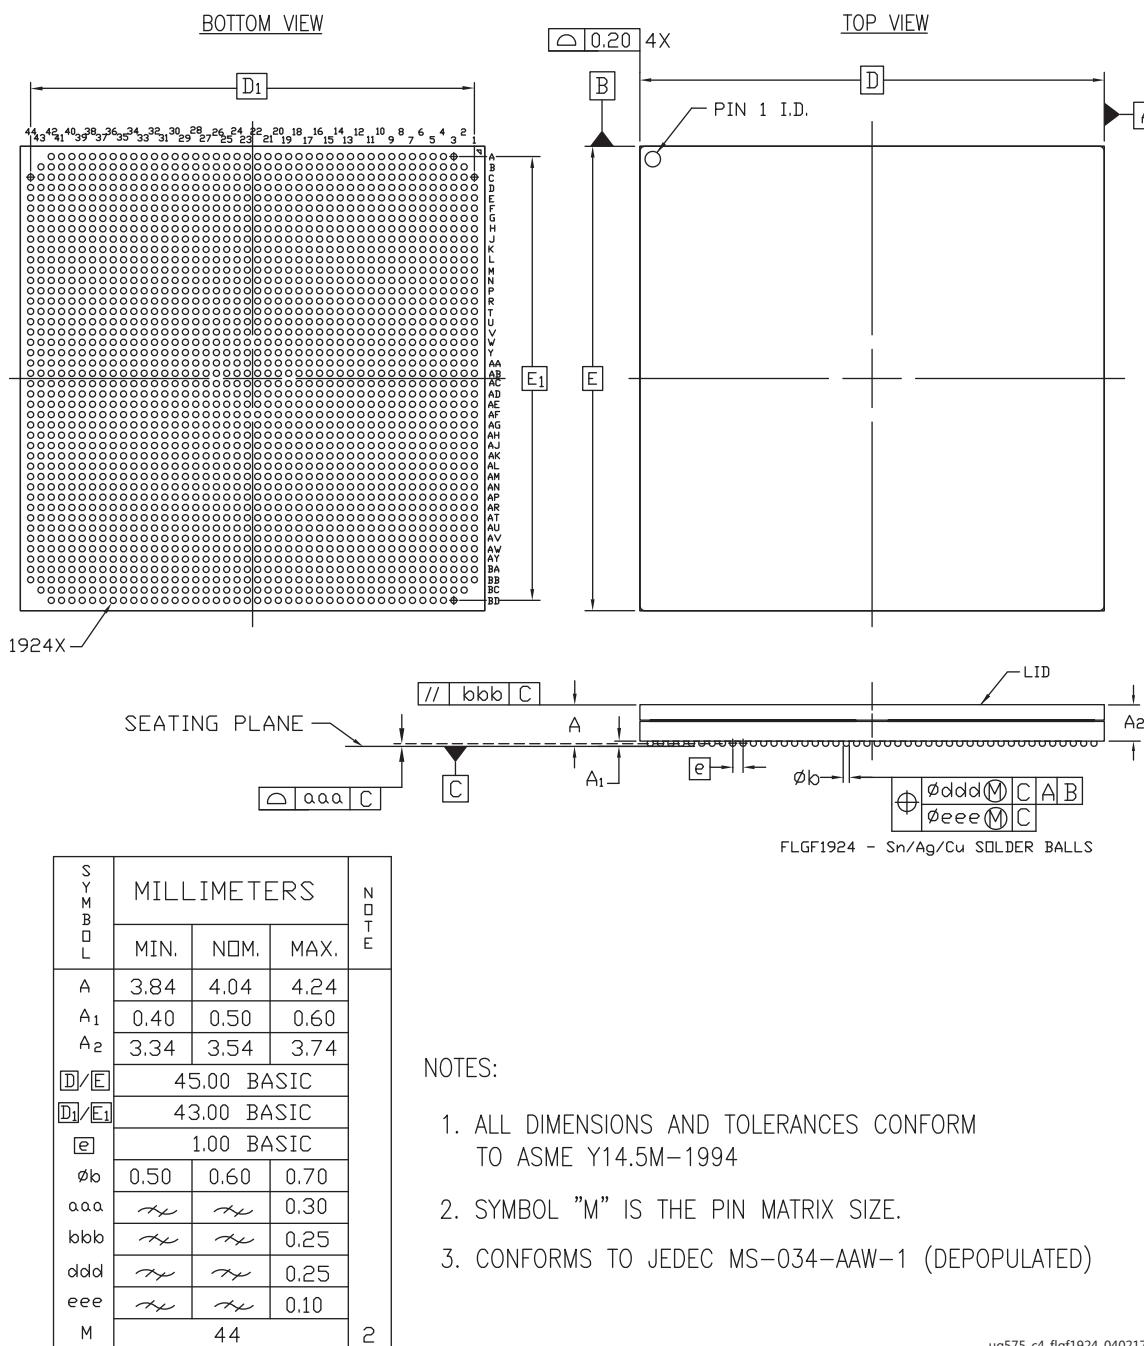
Package Dimensions for FLGF1924 (XCVU11P)
